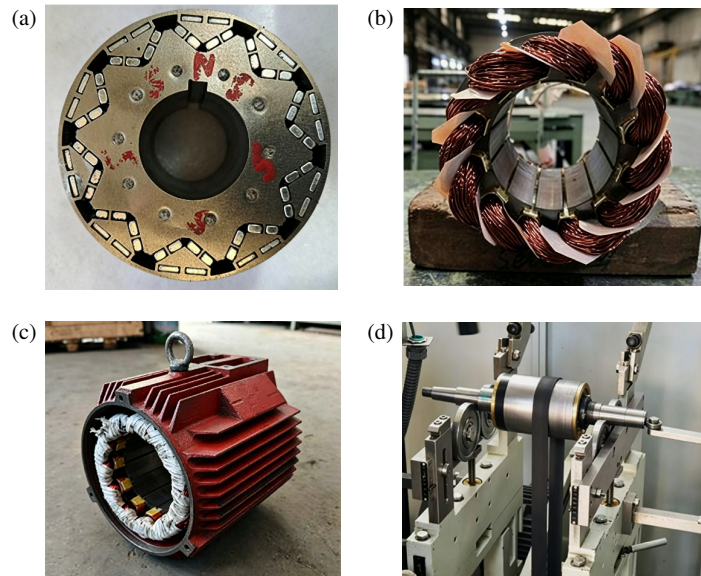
Motor prototype. (a) Rotor. (b) Stator. (c) Housing. (d) Shaft.
